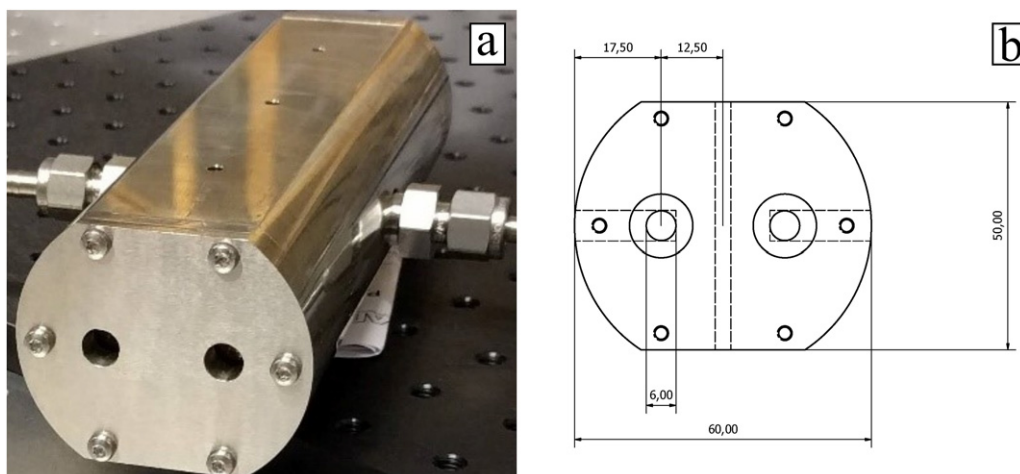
Panel (a): the Invar cavity assembly before being equipped with temperature sensors and mounted inside the aluminium oven. The plates screwed into the spacer at its short ends press the mirrors, via O-rings, onto the spacer. Panel (b): a schematic drawing of the cavity assembly. Units in mm. Reproduced from [32]. © The Author(s). Published by IOP Publishing Ltd. [CC BY 4.0](#).
